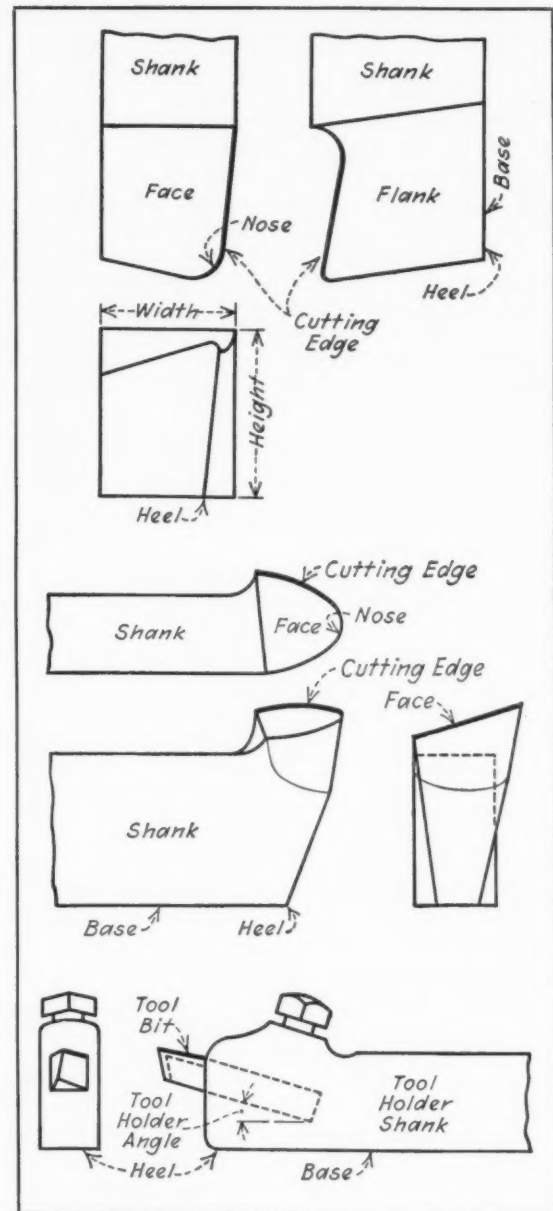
SINGLE-POINT CUTTING TOOLS SHOWING GROUND, FORGED, AND BIT-AND-HOLDER TYPES
